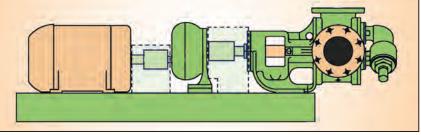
The rotary PD pump unit consists of the motor (left), gear reducer (center) and internal gear pump (right)
